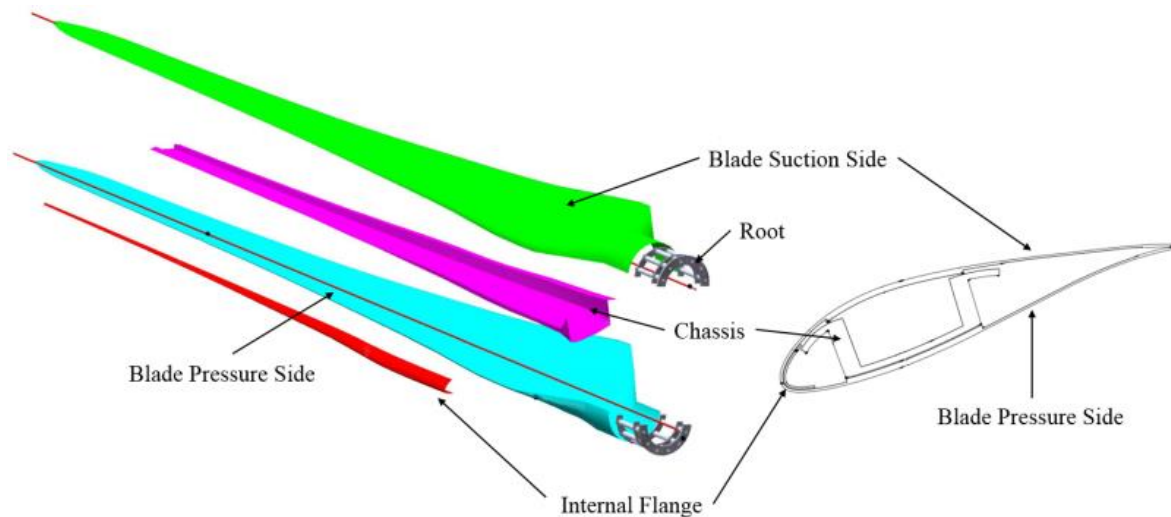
Blade assembly for 5-meter RUZGEM wind turbine blade [8].
